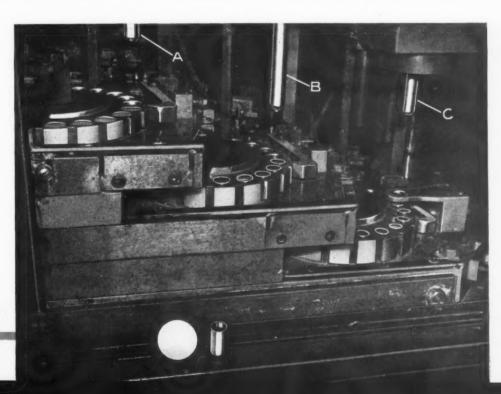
General View of a Press Equipped with a Multiple Number of Dies Arranged in Tandem for the Production of Cylindrical Generator Frames
